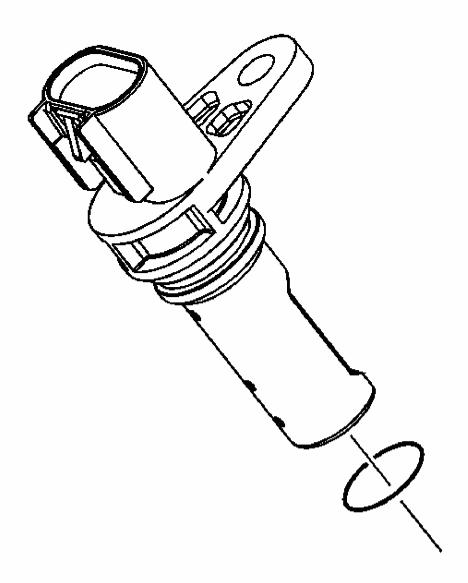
View Of CKP Sensor O-Ring Courtesy of GENERAL MOTORS CORP.
